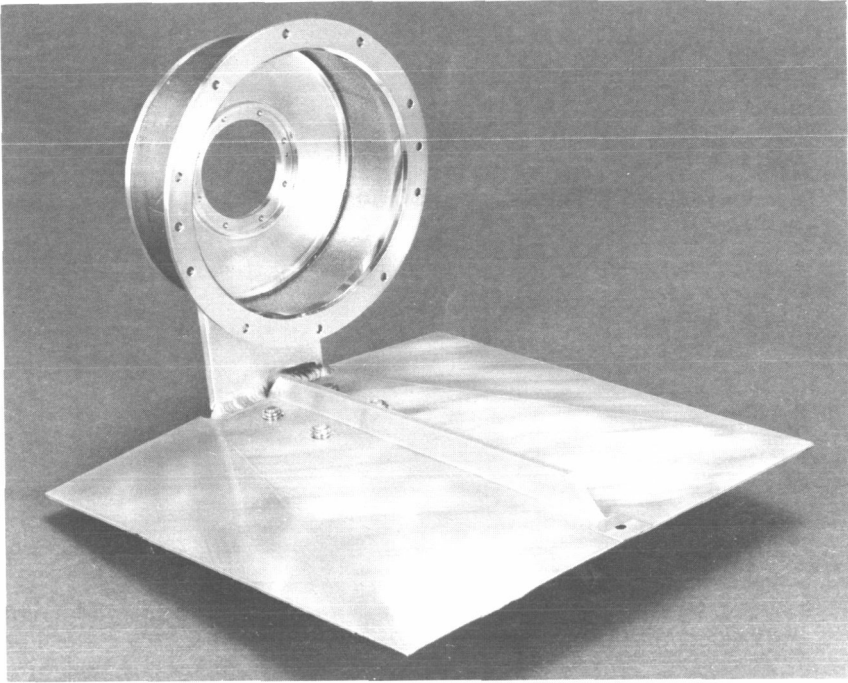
Front plate and radiator assembly with fiberglass insulating cylinder attached
